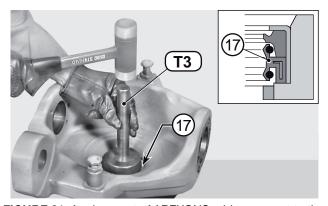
Apply a coat of AREXONS rubber cement to the outer metal surface of the snap ring (17). Position the seal ring and, using tool T3 (See drawing T3
